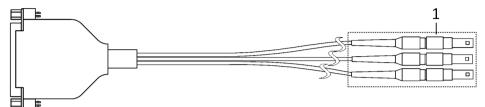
S-330.DL0 adapter cable: Piezo connectors [1]
